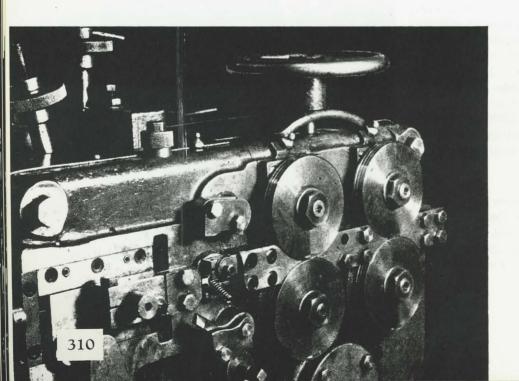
The Mainspring, which Actuates the Hammer when Trigger is Pulled, is Produced on the Automatic Spring-making Machine Illustrated. The Finished Spring Must be Held within Close Limits for Weight, Length, Diameter, and Deflection for Given Load
